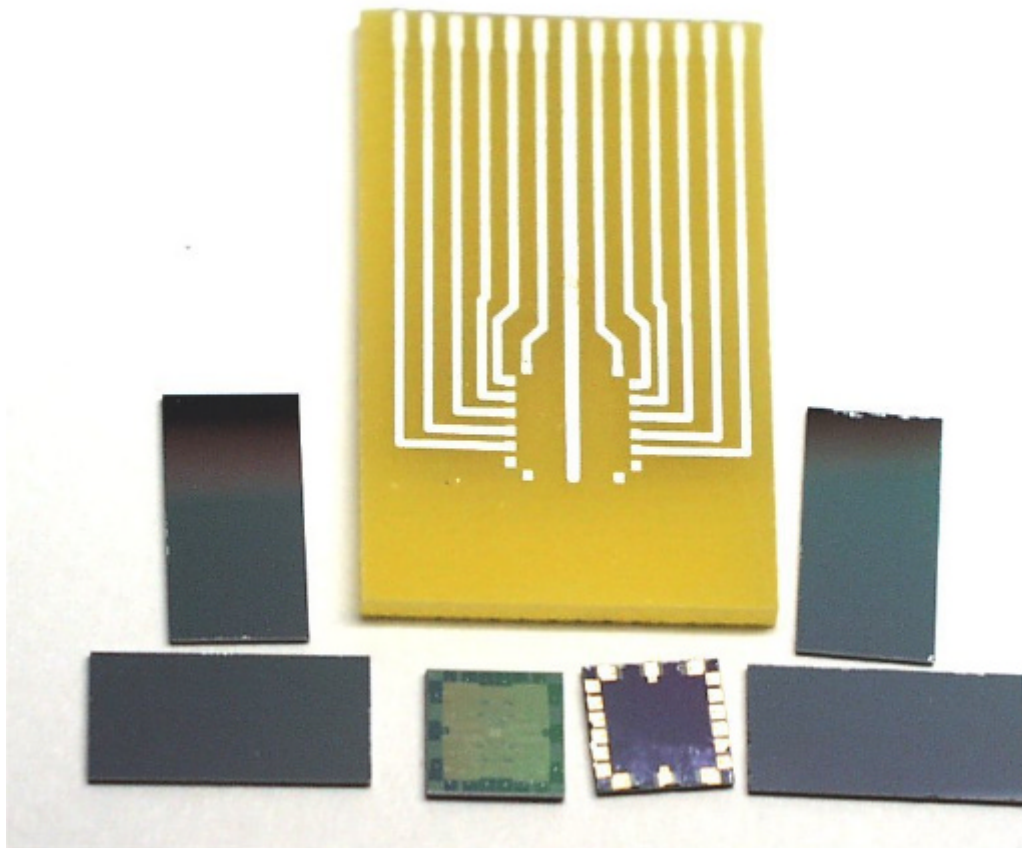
Un-encapsulated device for the Langmuir-Blodgett transfer of model membranes onto the chip surface. In the middle part two backside FET chips are shown. In the flip-chip process the chip is glued with its gold contacts onto the printed circuit board (PCB, MPIP Electronic Lab., 2000) and framed by four 6x12 mm dummy silicon pieces.
